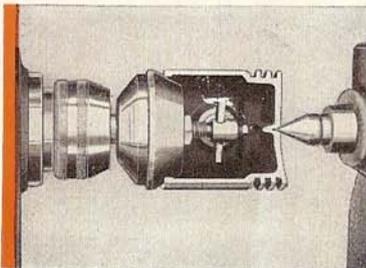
Cross-section View Showing Application of the Piston Adapter.
